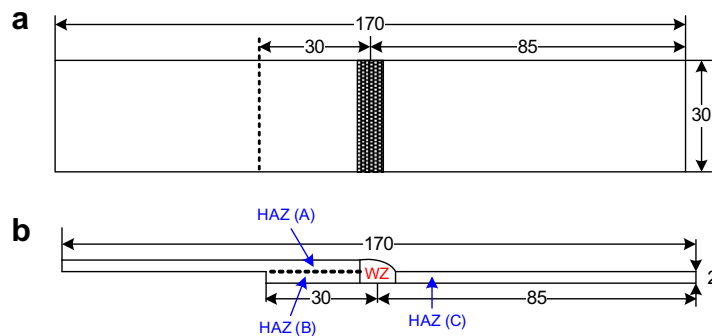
Dimensions of the transverse welded specimen for three point bending tests (in mm): (a) top view and (b) cross-section view.
